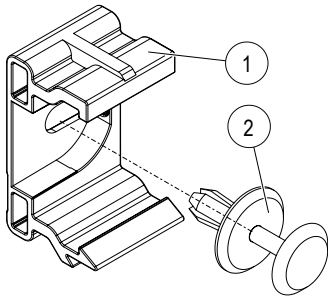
Hanger clamp (1) with expanding rivet (2)
